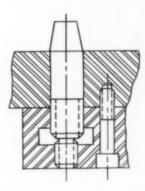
Key retainer held by cap screws which flank core. Method can be used when several cores are located on very close centers. Dowel pin or taper pin can be used instead of key.
